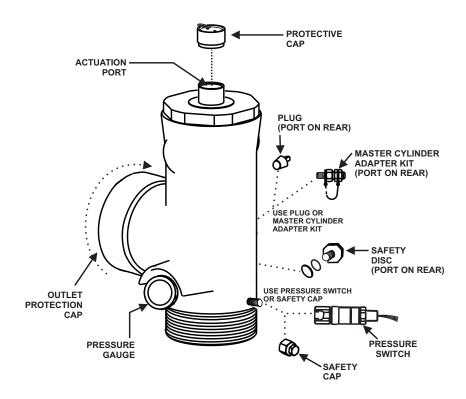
1½ in., 2 in. and 2½ in. Valve General Arrangement
